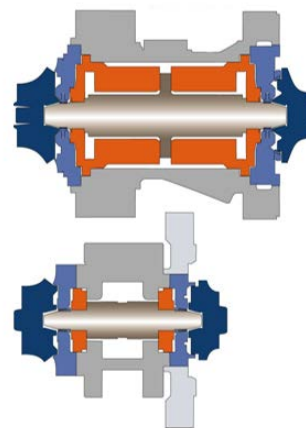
Turboexpander Rotating Assembly Comparison between Active Magnetic (Top) and Oil Bearing (Bottom) Systems
